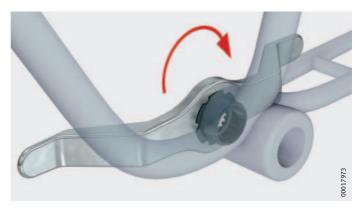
Tightening the bottom bracket bearing housing on the chain ring side using an bottom bracket bearing hand wrench
